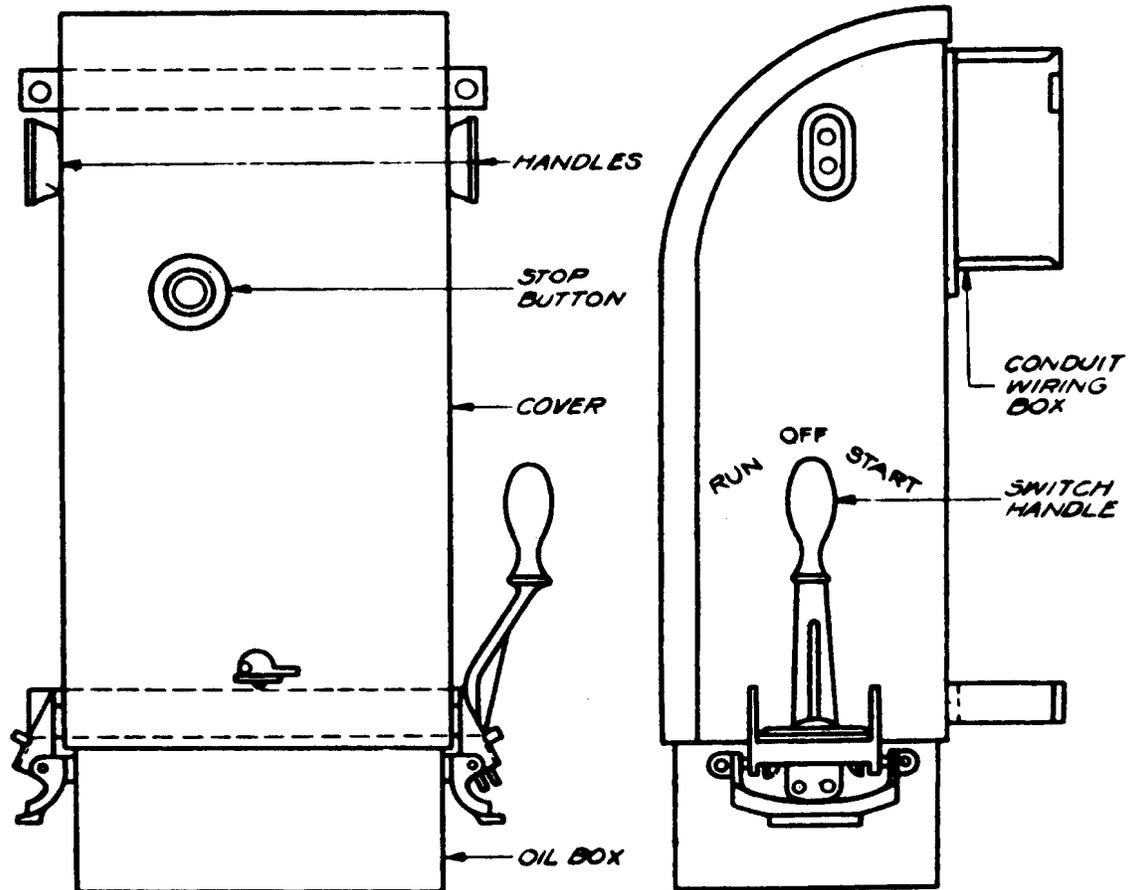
Hand Starting Compensators For Polyphase Motors-Outline
